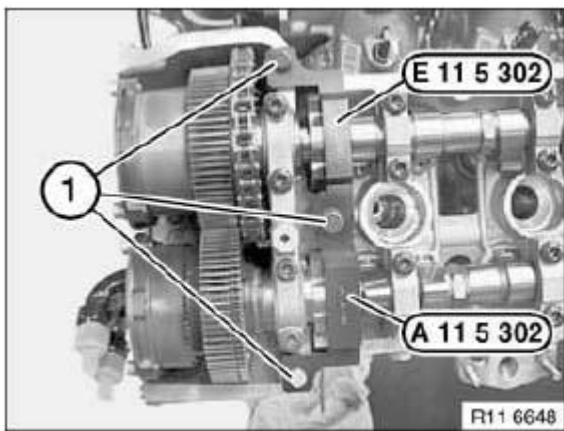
Identifying Special Tool E 11 5 302 And A 11 5 302
